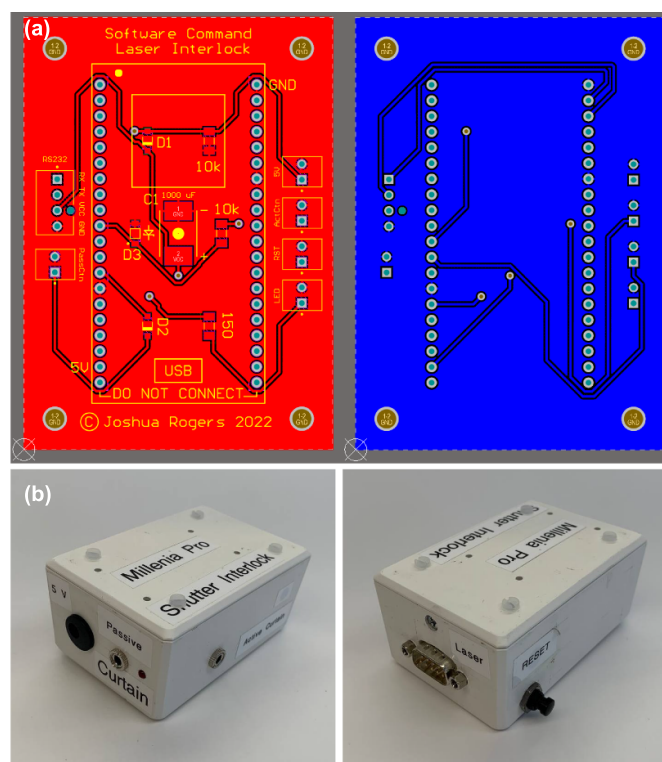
(a) The bespoke PCB front (red) and back (blue) planes. (b) Pictures of the finished interlock box, measuring $9 \times 6 \times 4$ cm.
